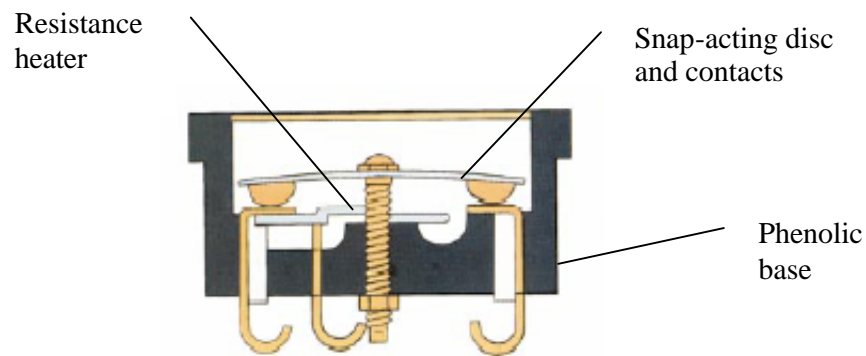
Section view of a phenolic motor protector – contacts closed
